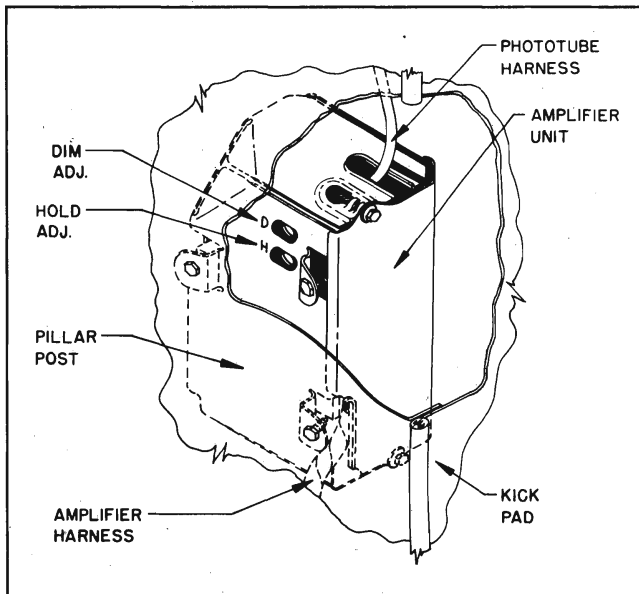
Dim and Hold—Adjustment Screw Location
